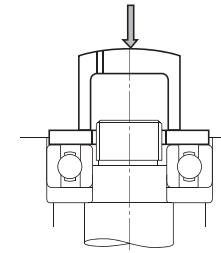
Simultaneous Press Fitting of Inner and Outer Rings
